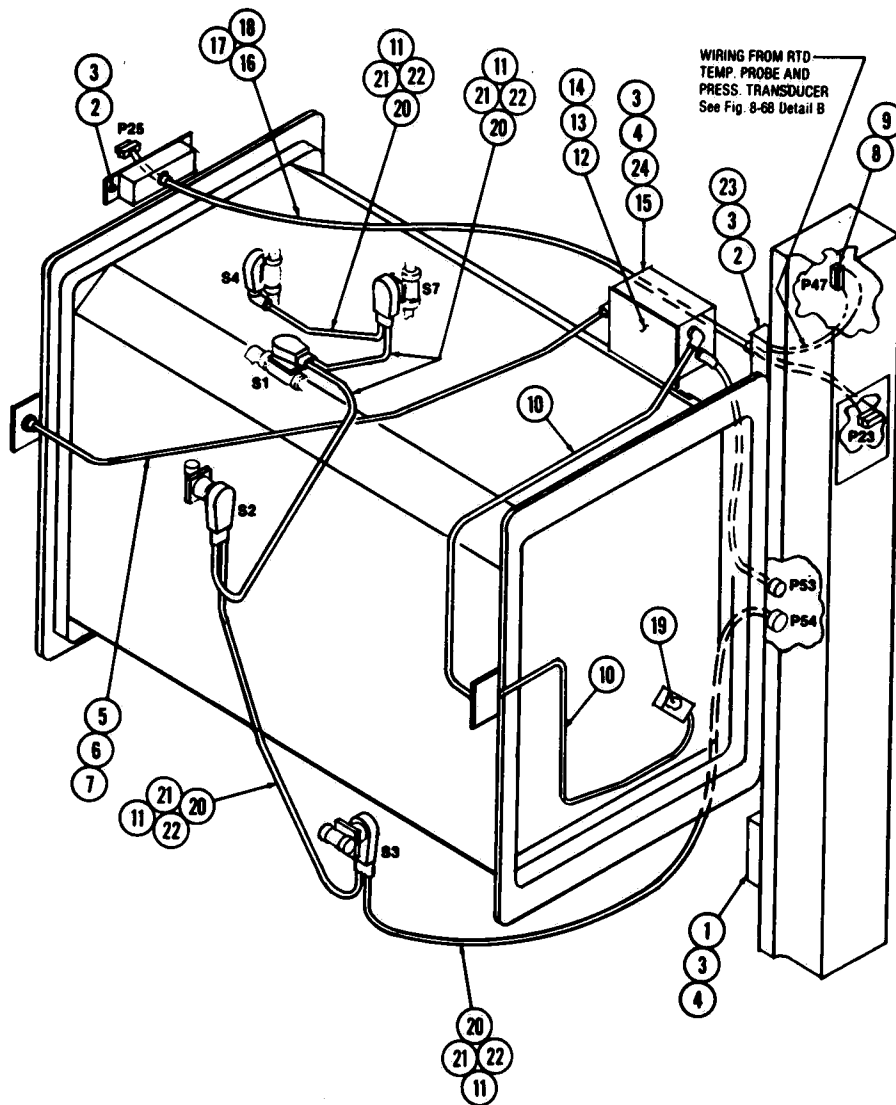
WIRING ASSEMBLY: Double Door Sterilizers with Printcon.
